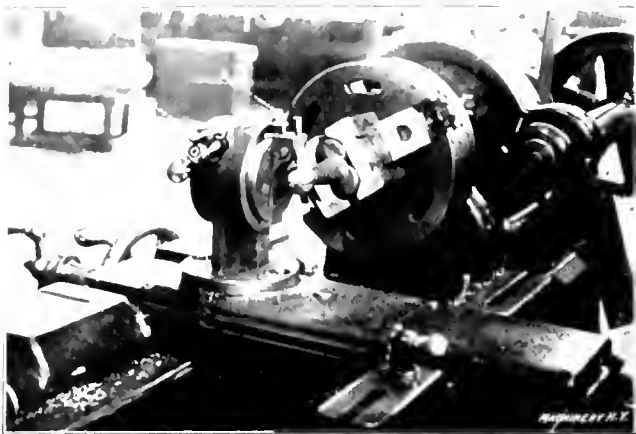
Attachment for Turning Spherical Ends of Different Diameters for Ball-and-socket Joints
